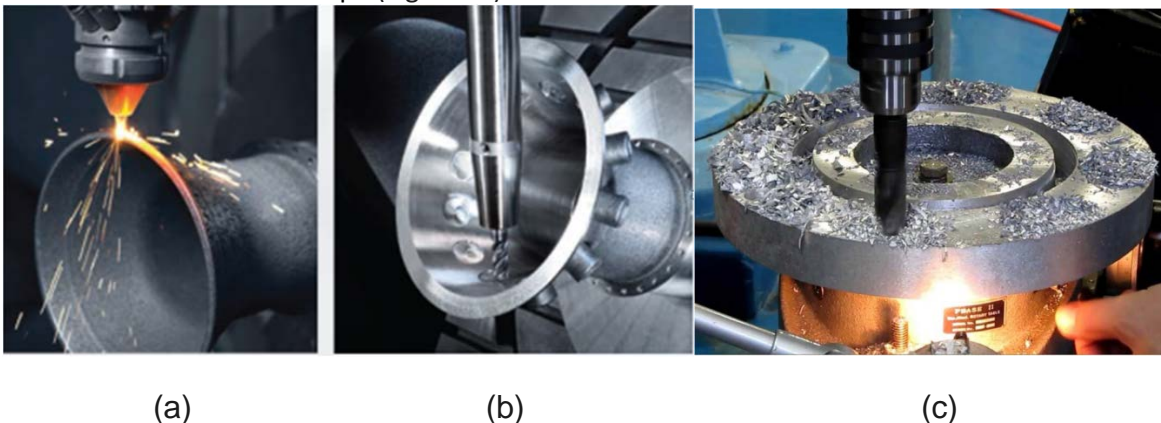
(a) Additive Manufacturing Process, (b) Hybrid - Additive + Subtractive Manufacturing Process, (c) Subtractive Manufacturing Process
